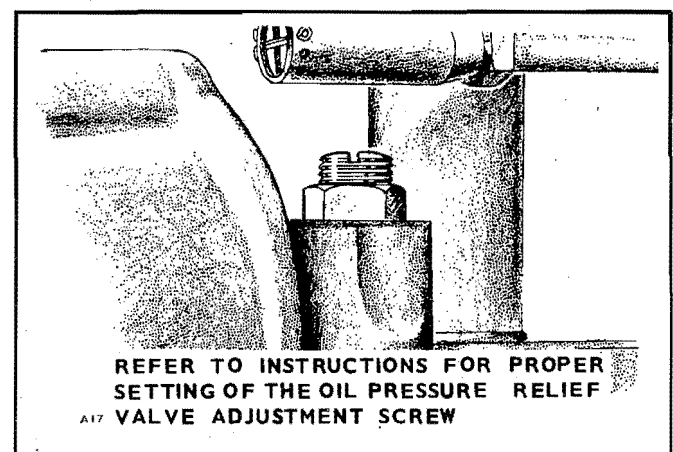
OIL PRESSURE RELIEF VALVE ADJUSTMENT
